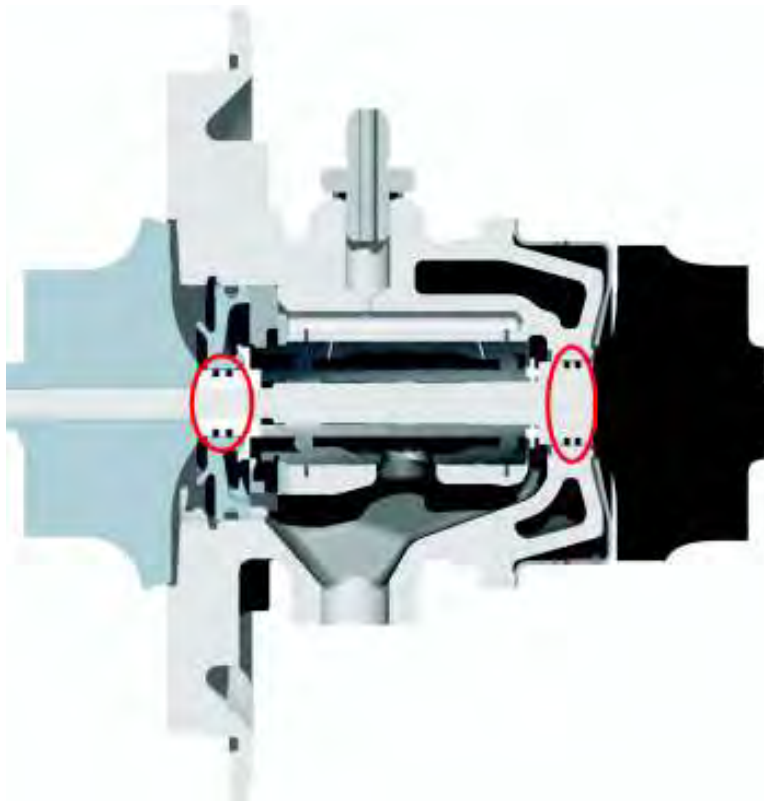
Dual Compressor and Turbine Piston Ring Seals
